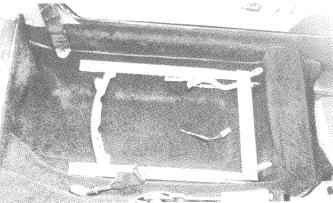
The seat runners and 2 rear seat belt anchor points bolted in place. Note the pressure pad harness
